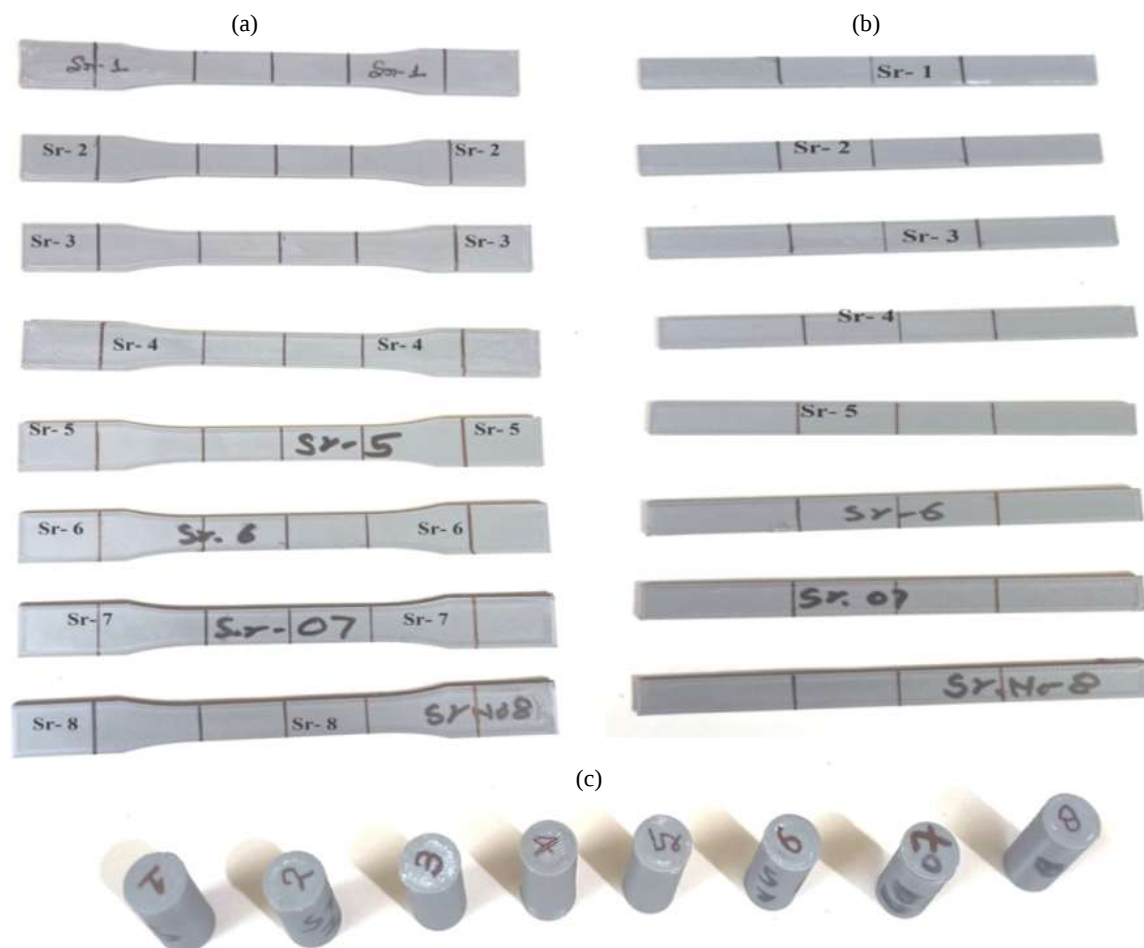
Sample for (a) Tensile, (b) Flexural, and (c) Compressive strength test fabricated using 3d printer.
